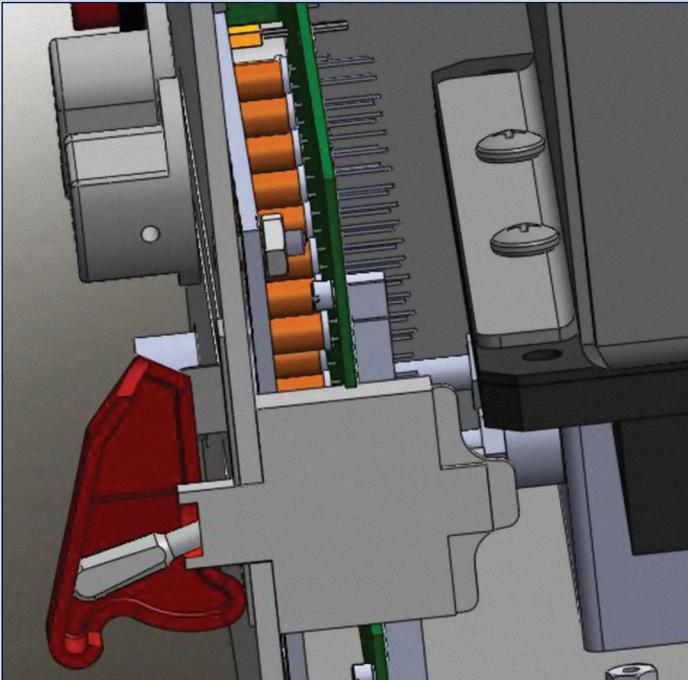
CAM assembly model containing COTS and custom parts to check for interferences.
